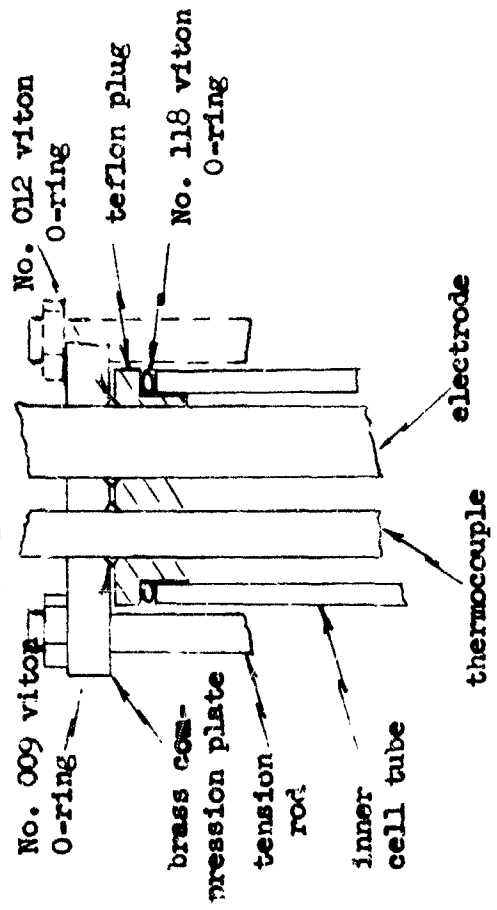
Detailed drawing of vacuum seal unit for cold electrode chamber (actual size).
